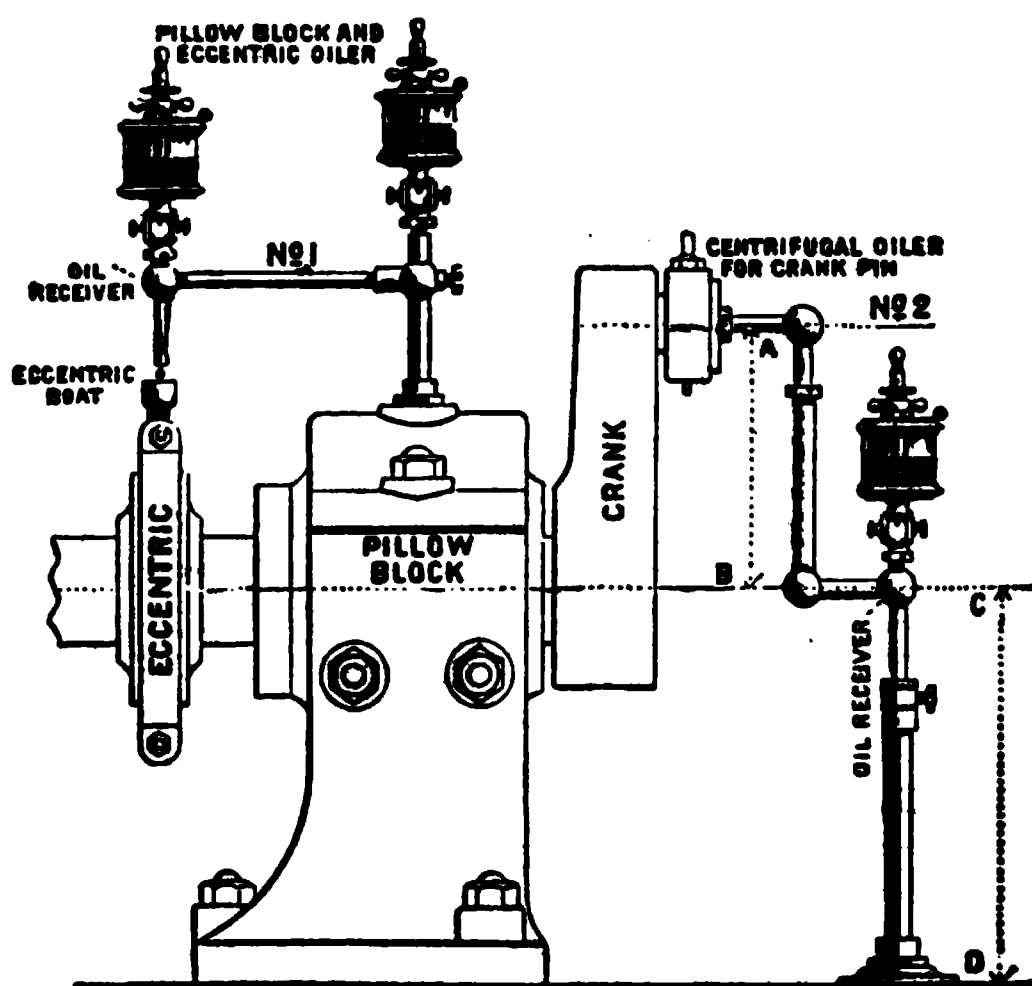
Powell oiling devices for crank pin, pillow block and eccentric.
